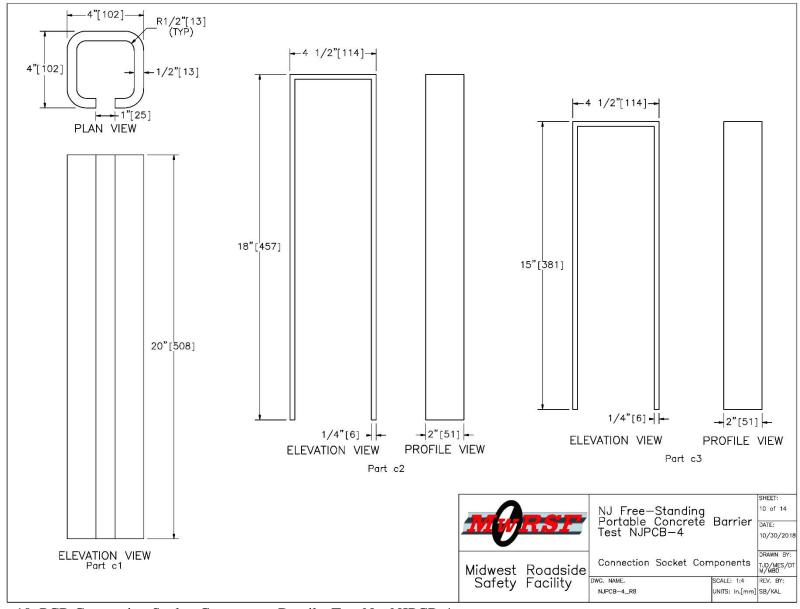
PCB Connection Socket Component Details, Test No. NJPCB-4
